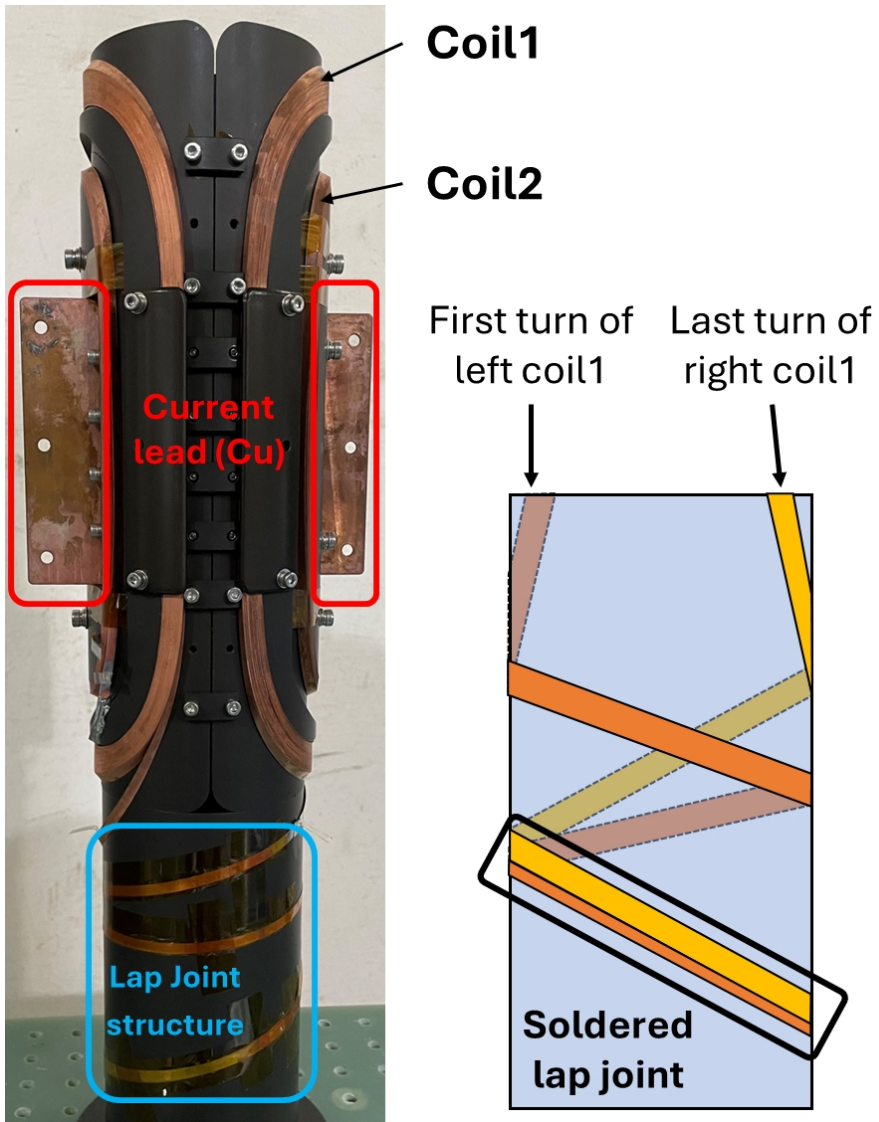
Photograph of the demo magnet fabrication and the implementation method for soldering lap joints
